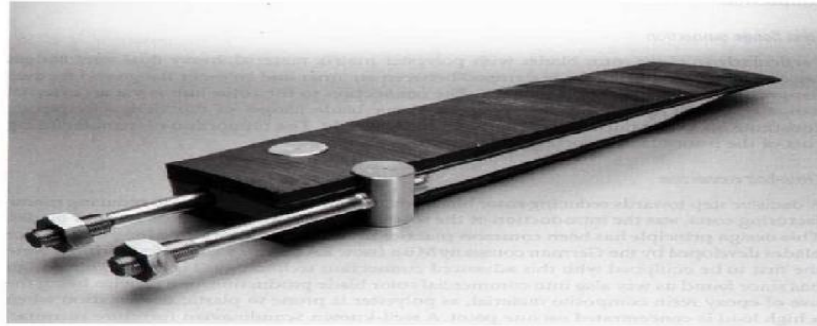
Cut away of cross bolt connection method used on turbine blades [9]
